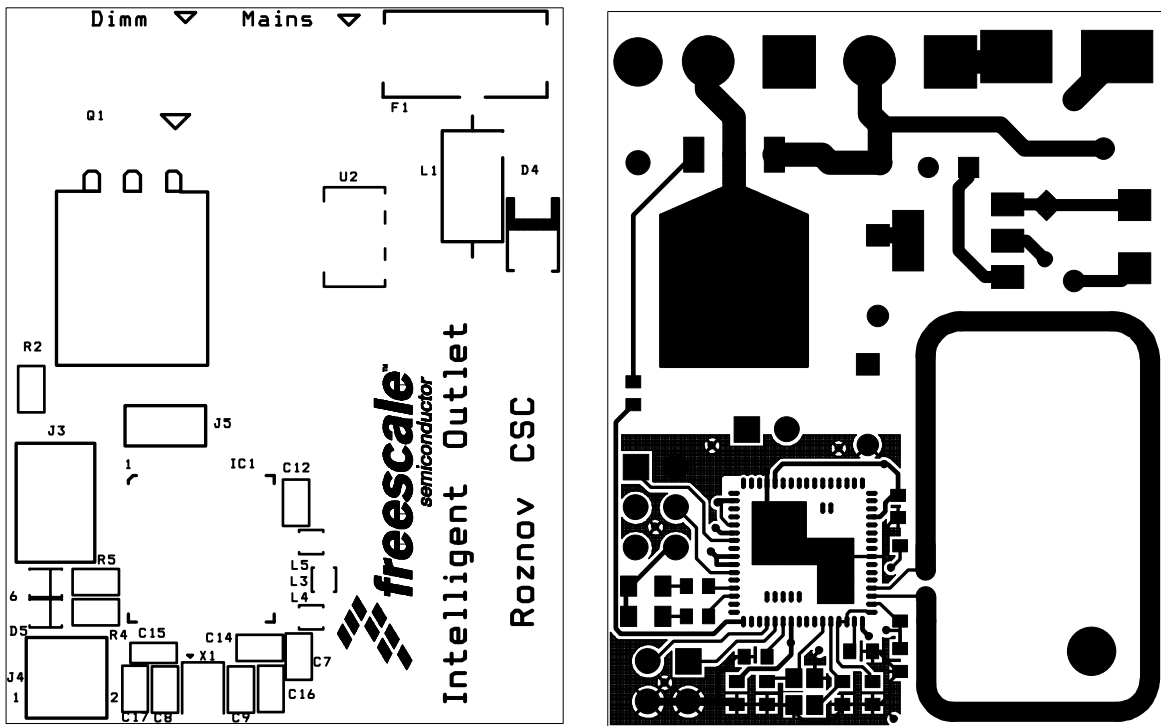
Intelligent Outlet Version 2, Parts Placement and PCB Layout, Top Side
